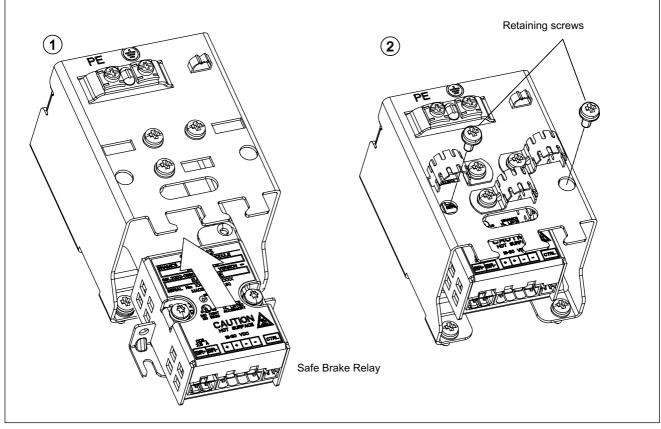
Mounting the Safe Brake Relay on the Screening Kit (frame size FSA)
